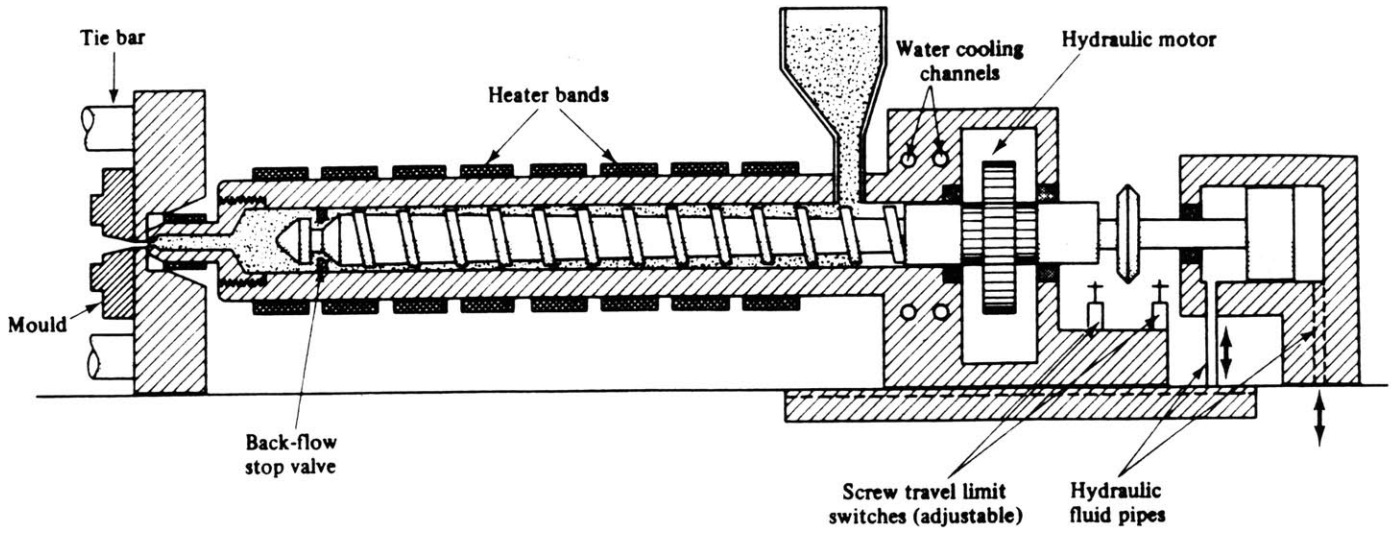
Reciprocating Screw Machine, excerpted from [7]
